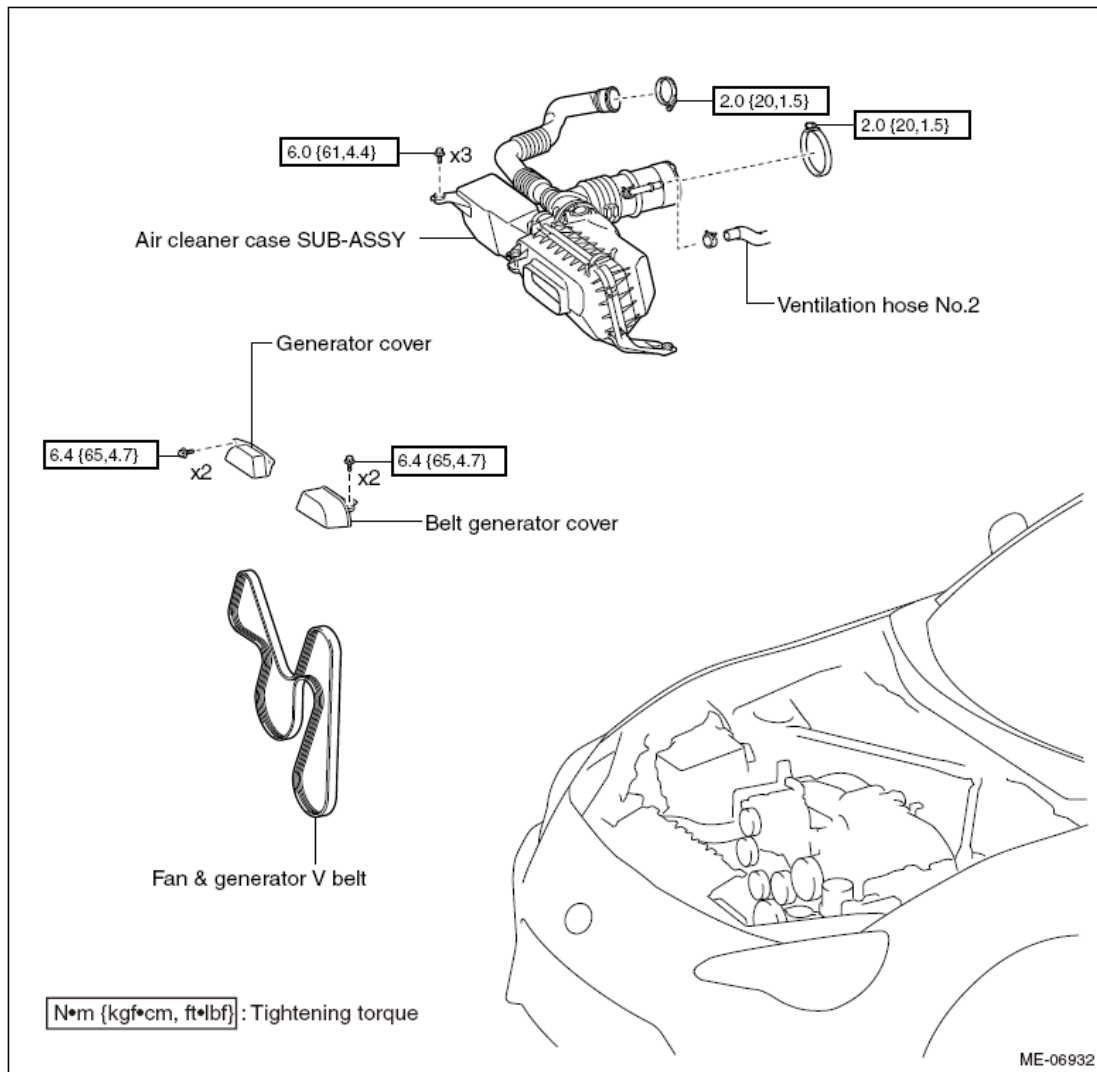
Identifying Timing Chain Cover Oil Seal (FA20) Components With Torque Specifications (1 Of 2)
